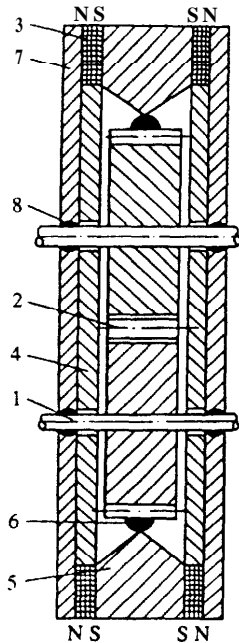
Schematic diagram of the leak-proof friction unit with lubricant circulation under the action of magnetic and centrifugal forces [31]: 1, shafts; 2, pair of gearing wheels; 3, magnets; 4, non-magnetic insert; 5, pole piece; 6, magnetofluid lubricant; 7, end-type covers; 8, sealing magnetic fluid.
